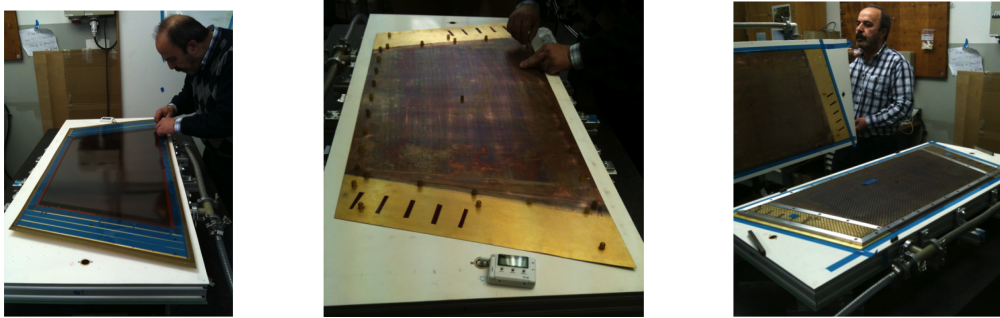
Left: Preparation of the upper side of the readout PCB. Center: Positioning of the peek inserts on the bottom side of the readout PCB. Right: The first PCB skin sucked in the assembly table and equipped with aluminum honeycomb and frames (the double rib of the lateral frames are clearly visible). The second PCB is sucked on the second table.
